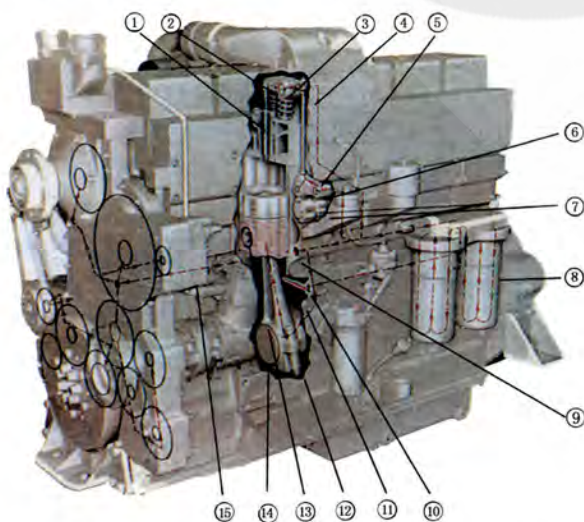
Lubricating oil flow (intake side) KT-38 engines
